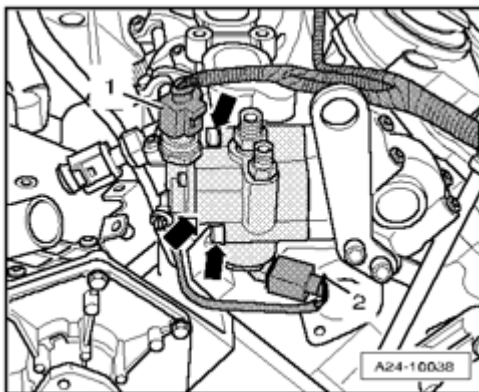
Disconnecting Electrical Connectors & Removing High Pressure Pump From Left Cylinder Head
